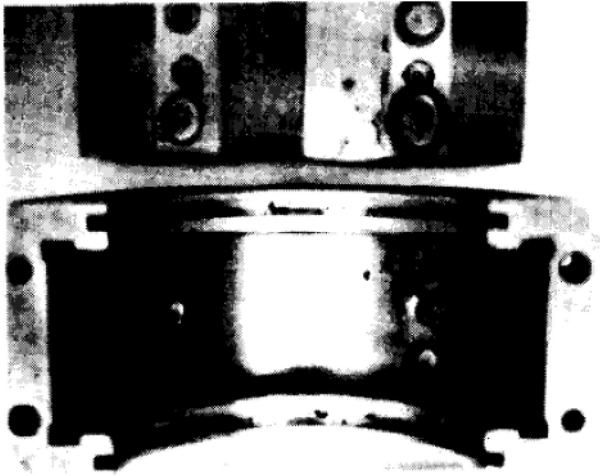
The most severe case of electrical bearing failure: welding. The pads were welded into its retainer. Reproduced with permission from Ref. [85], © IEEE 1991.
